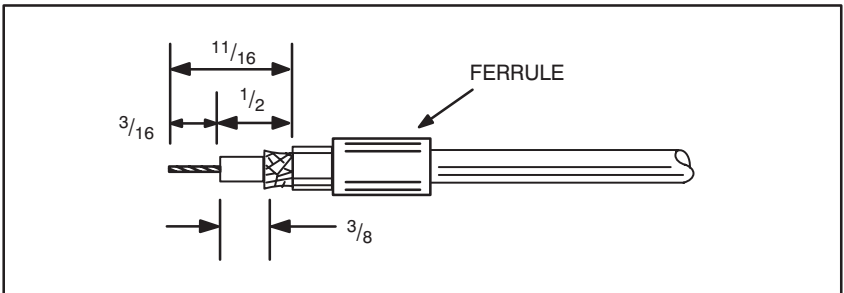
RG-11/U (Belden 8213) Cable Stripping Dimensions
